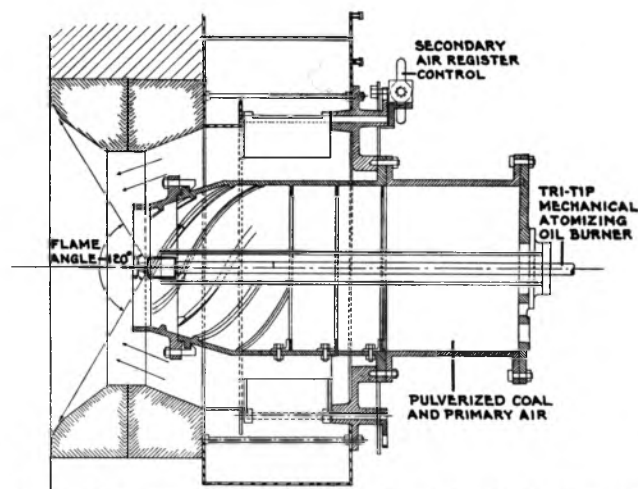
ORIGINAL BURNER ASSEMBLY WITH TRI-TIP MECHANICAL ATOMIZING OIL BURNER
